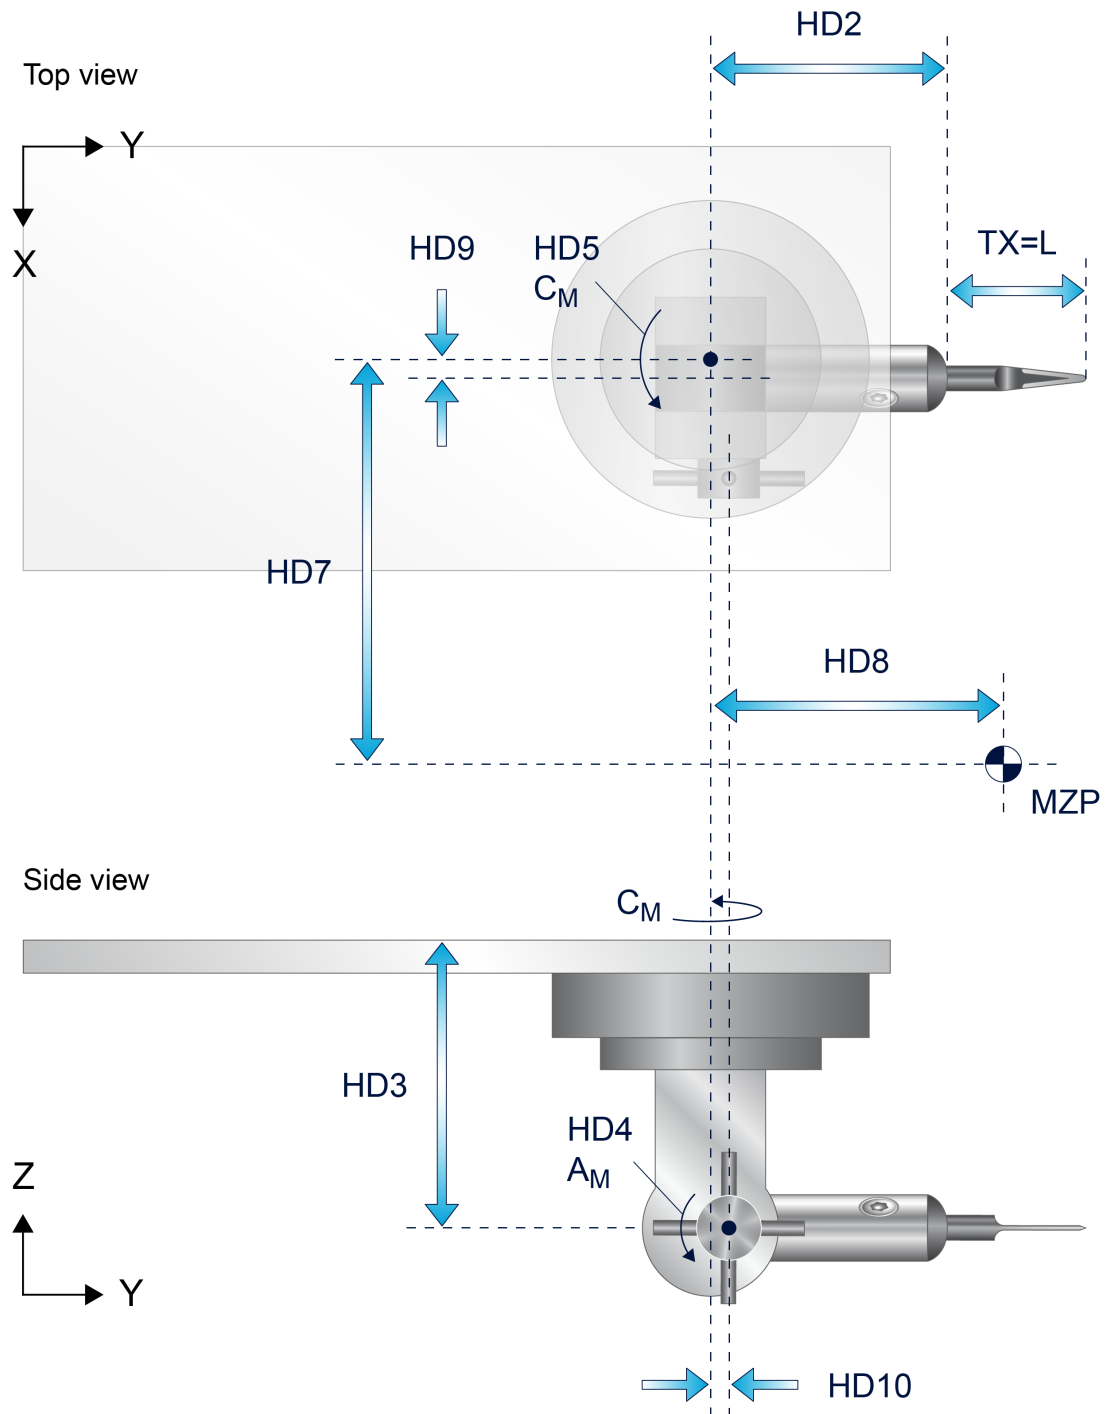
5-Axis metal cutting tool with 90 degree angle setting
